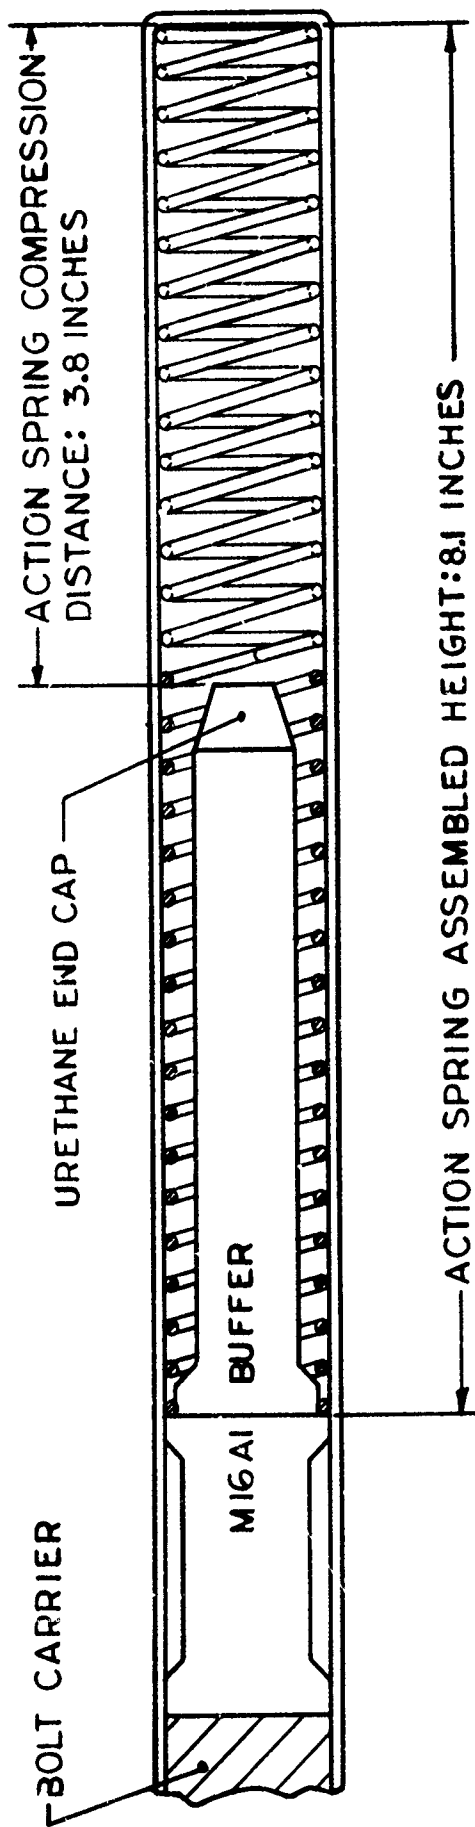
Engineering Sketch of the Buttstock Extension Tube, Buffer, and Action Spring for the M16A1 Rifle and XM177E2 Submachine Gun.
